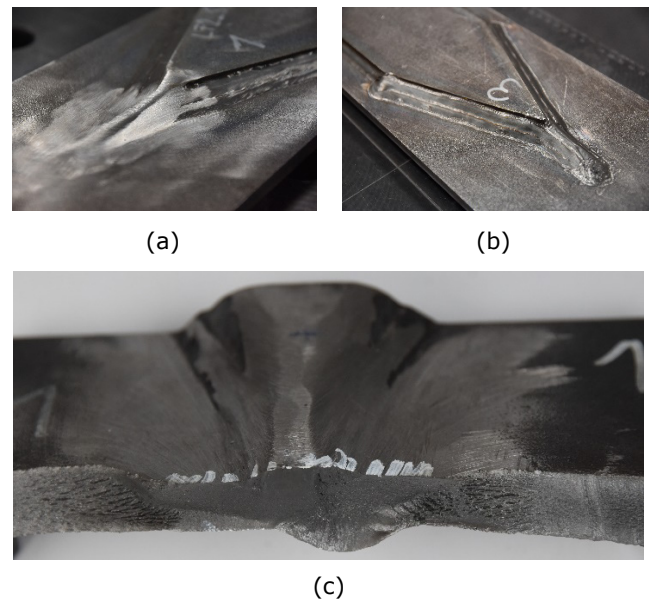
Post-weld treated specimens: (a) grinded specimen, (b) HFMI-treated specimen, (c) shift of the crack initiation into the extended weld seam by post-weld treatment.
